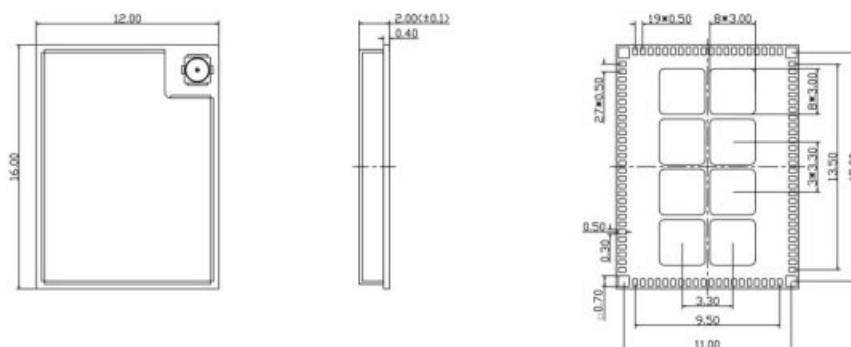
BM3301-1216 Module Package Outline Drawing
